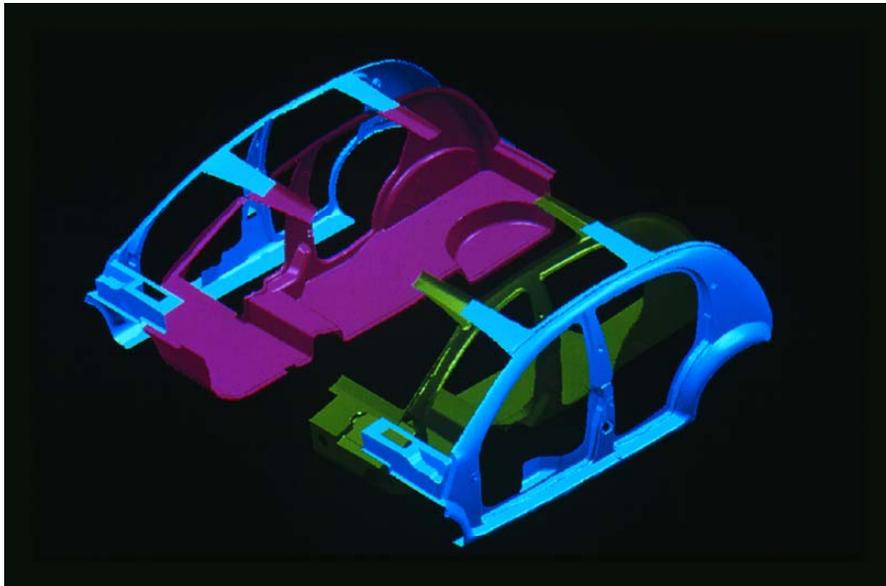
The four major injection-molded, thermoplastic CCV body parts before assembly
